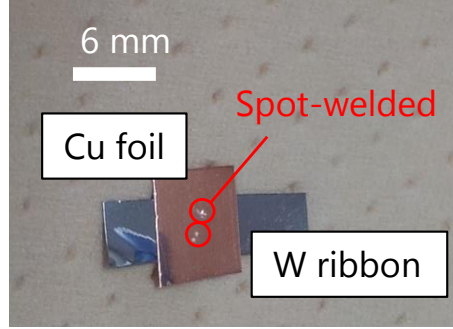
2 Picture of sample composed of welded Cu foil and W ribbon. The welding spots align perpendicular to the long axis of the W ribbon.
